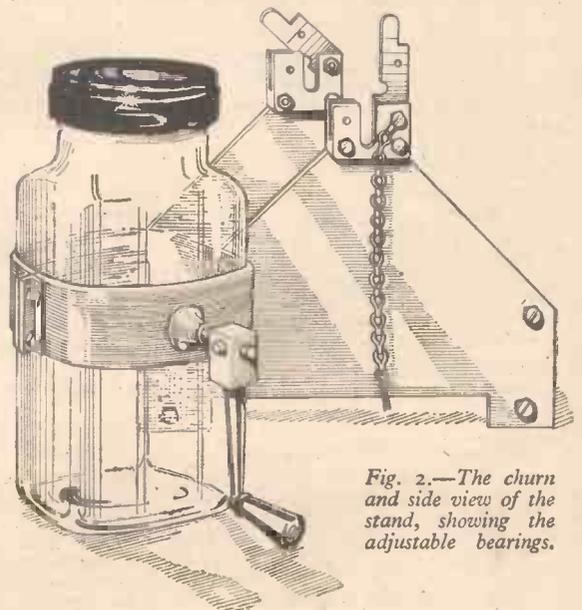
The churn and side view of the stand, showing the adjustable bearings.
